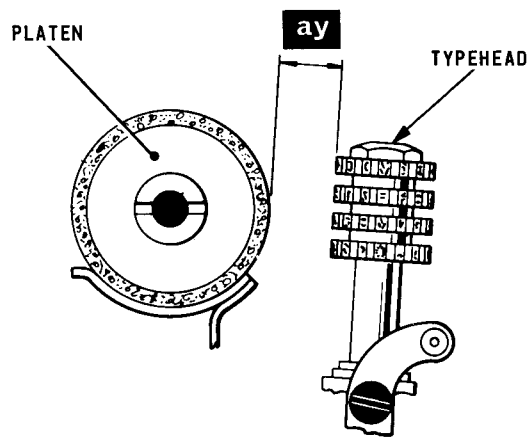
TYPEHEAD/PLATEN CLEARANCE
